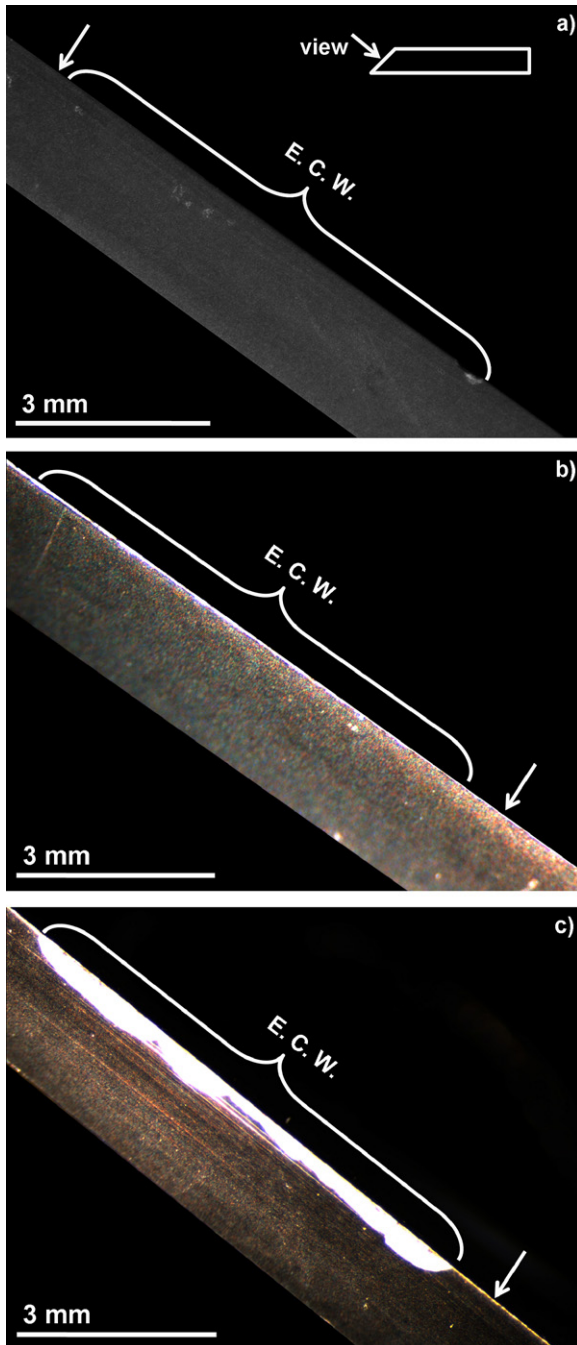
Optical microscopy pictures of the cutting edge (arrow) of samples after the cutting trial on wood. Sketch shows the viewing angle of the images. (a) Knife made by GPS/HIP of composition A, knives produced by HP/HIP (b) and HP (c). E. C. W. edge in contact with wood.
